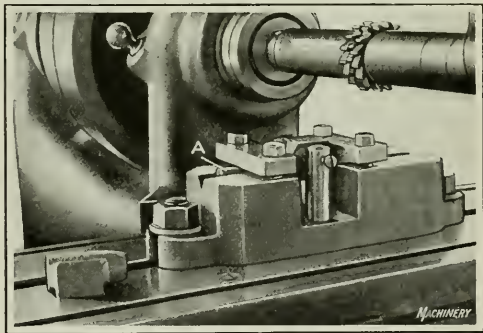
Equipment used for milling the Surfaces by which the Table Stem Bearing is fitted to the Stand
